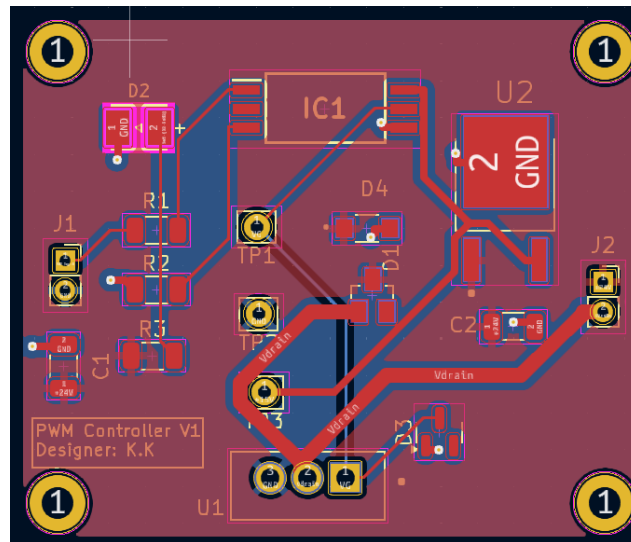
PWM Controller V1 Printed Circuit Board (PCB) layout design
